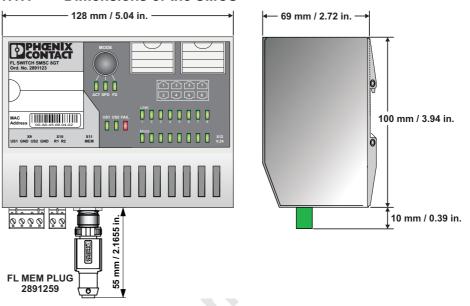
Housing dimensions of the SMCS in millimeters (inches)
